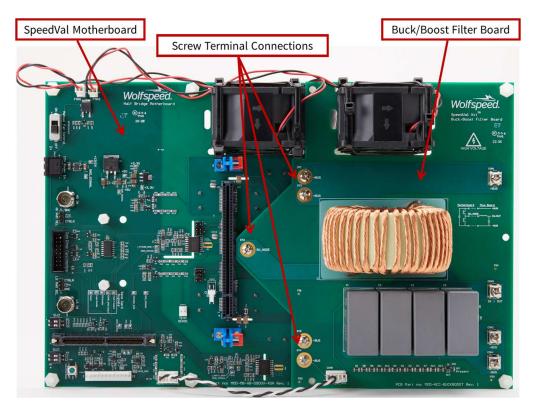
SPEEDVAL KIT MOTHERBOARD WITH BUCK/BOOST FILTER BOARD ASSEMBLY
